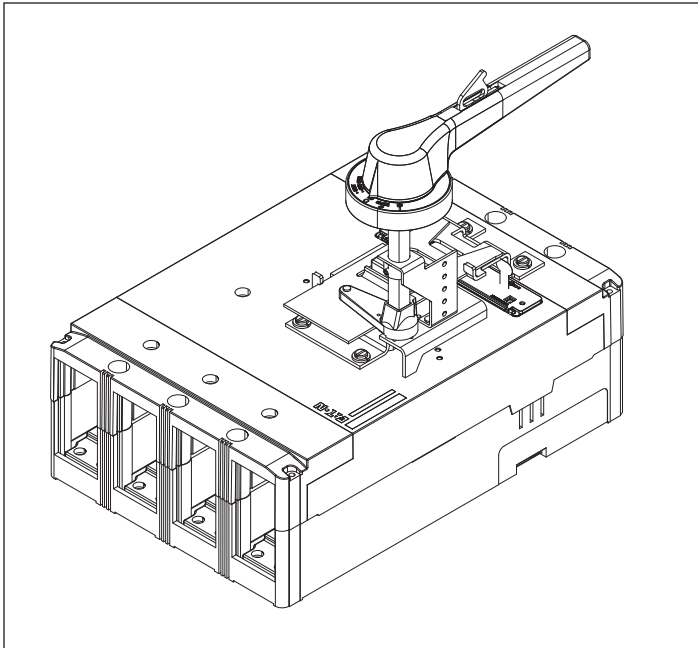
PDG5 Rotary Handle Mechanism Assembly.
